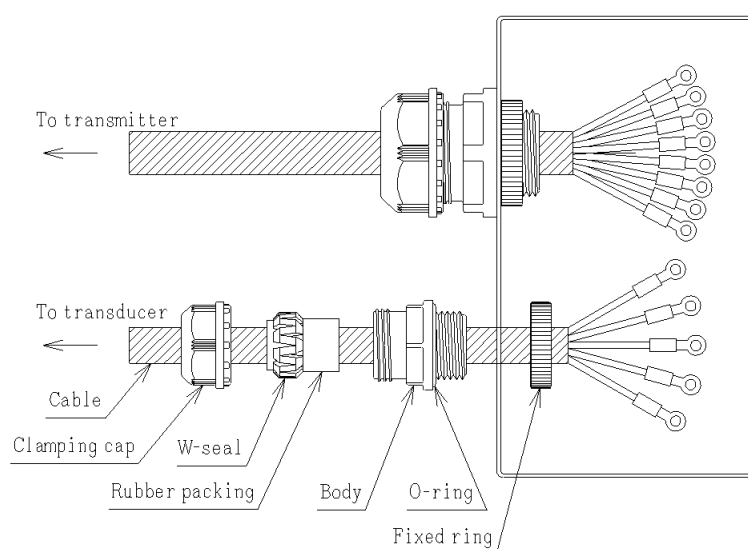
Assembly diagram of repeater Assembly method (only side on the transducer)
